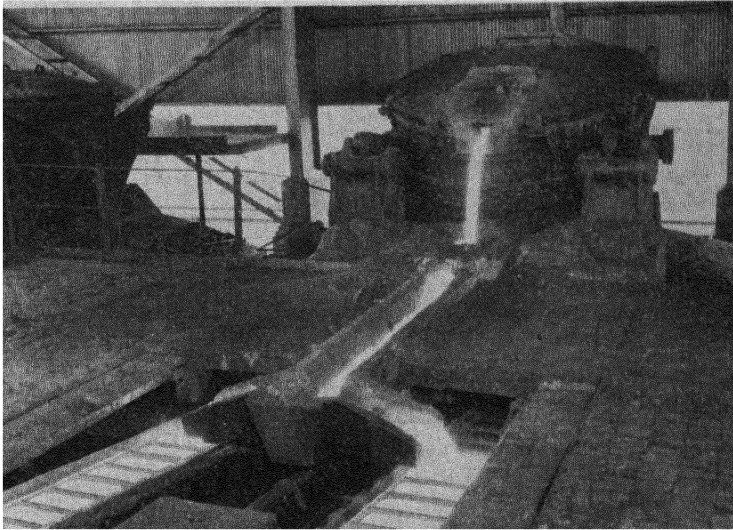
Hot-metal ladle pouring at pig machine. (Courtesy of Woodward Iron Co.)
